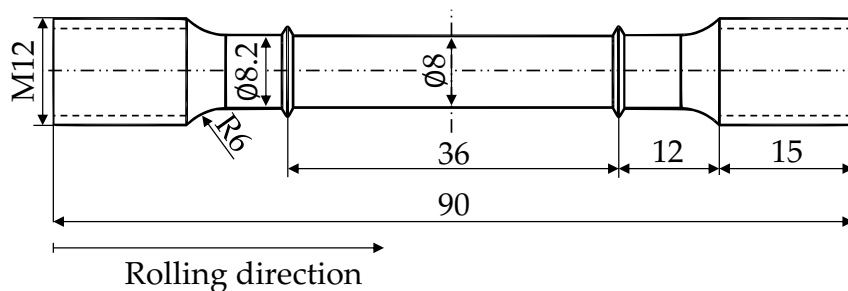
Geometry and key dimensions of a generic test piece design. Units are in millimetres.
